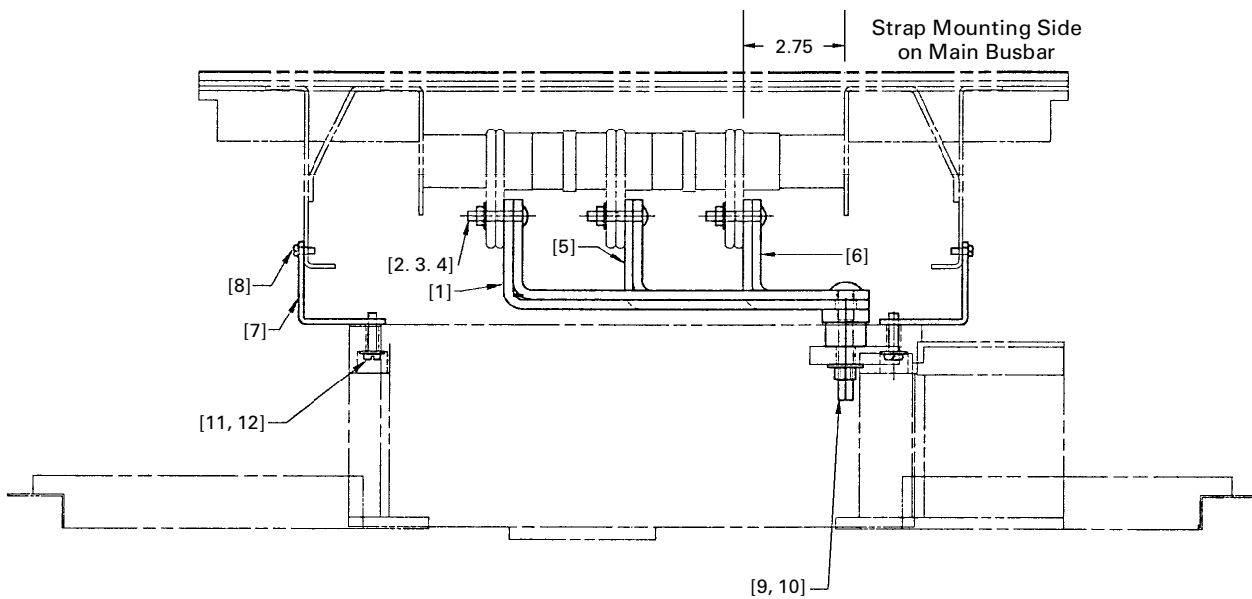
Mounting a K frame bolt-on circuit breaker, assembly end view.
